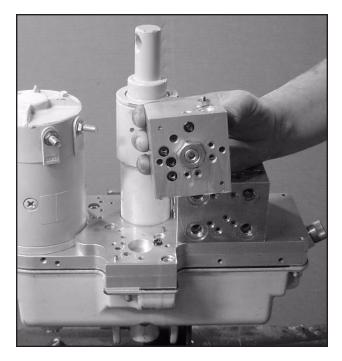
Replace the five o-rings and install the Universal Valve Block Assembly to the Base Plate.
